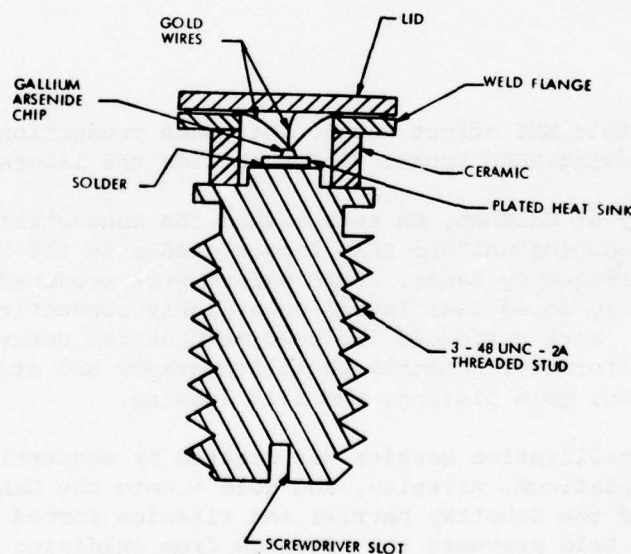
Diode Cross Section of Plated Heat Sink Design
